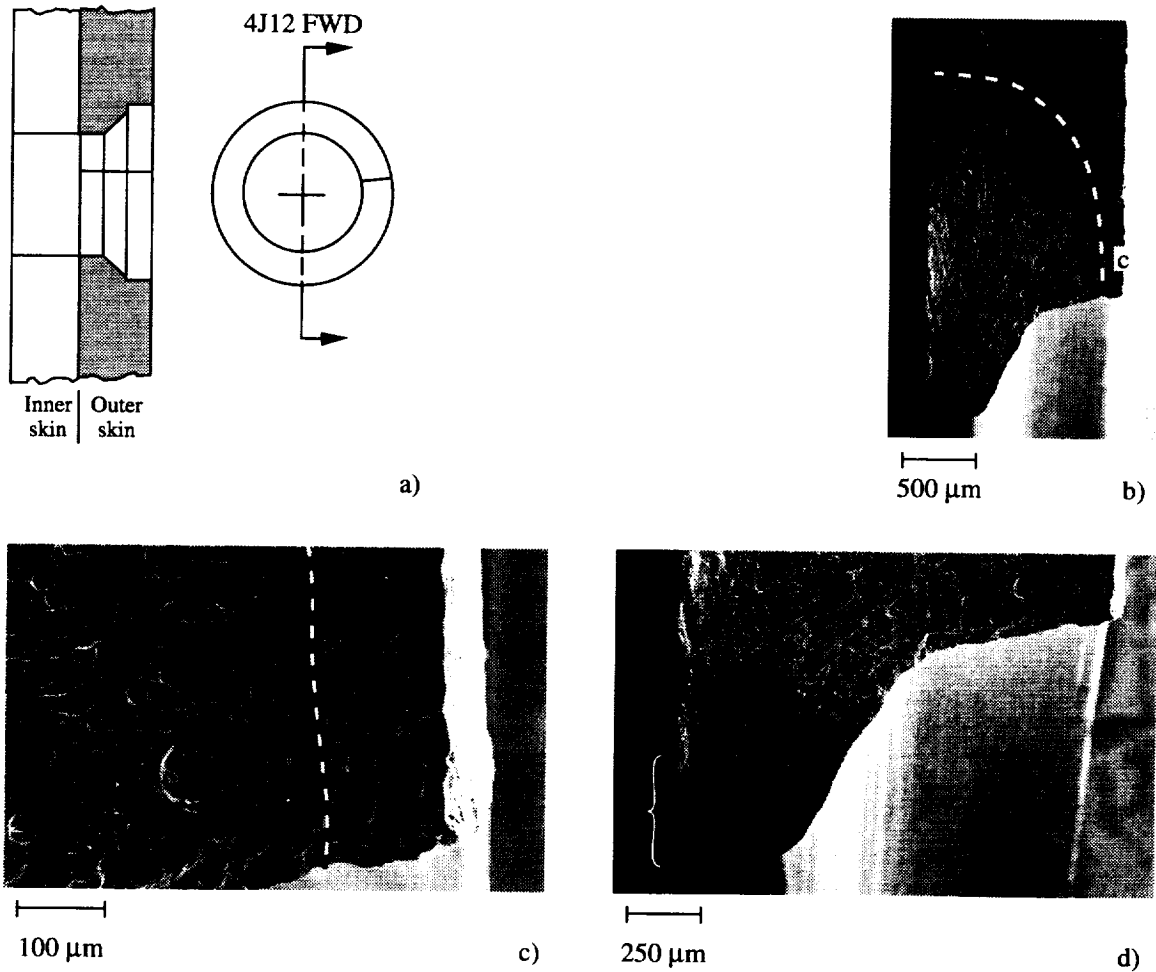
a) The schematic shows the rivet hole 4J12 configuration and the location of the outer skin fatigue crack oriented in the forward direction and above the 3 o'clock position. b) The SEM micrograph shows the fatigue crack fracture surface located at the outer skin rivet hole (bottom). The dashed line marks the fatigue crack front. c) The SEM micrograph shows the fatigue crack front at region "c" in Figure 11.27.b. The dashed line marks the fatigue crack front where it intersects the rivet hole (bottom). The outboard surface of the outer skin is located at the right of the micrograph. d) The SEM micrograph shows the fatigue crack initiation region located at the faying surface (bracket).
